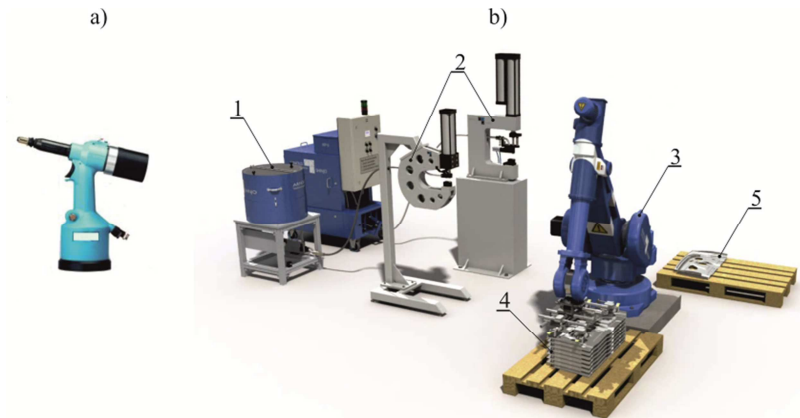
The joining systems: a) manual, b) fastener automated assembly stand; 1 – the fastener separator, 2 – the press with the C-frame, 3 – the industrial robot, 4 – the sheet material part for joining, 5 – the part with the pressed fastener
